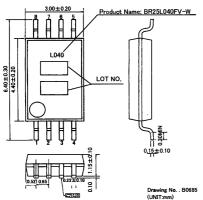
(c) PHYSICAL DIMENSION SSOP-B8(BR25L040FV-W)
